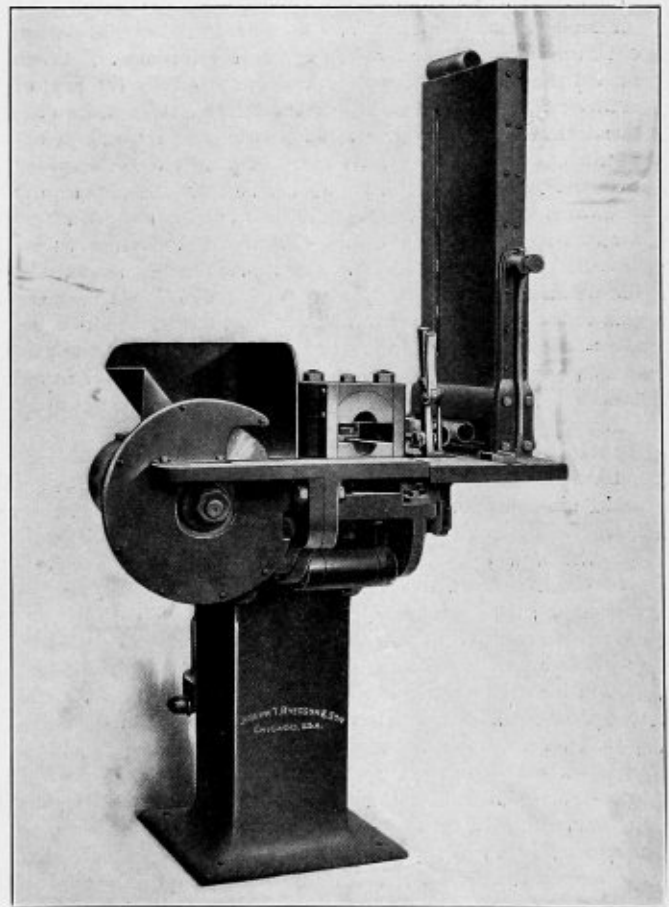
HOT SAW AND EXPANDER WITH SAFE END MAGAZINE
